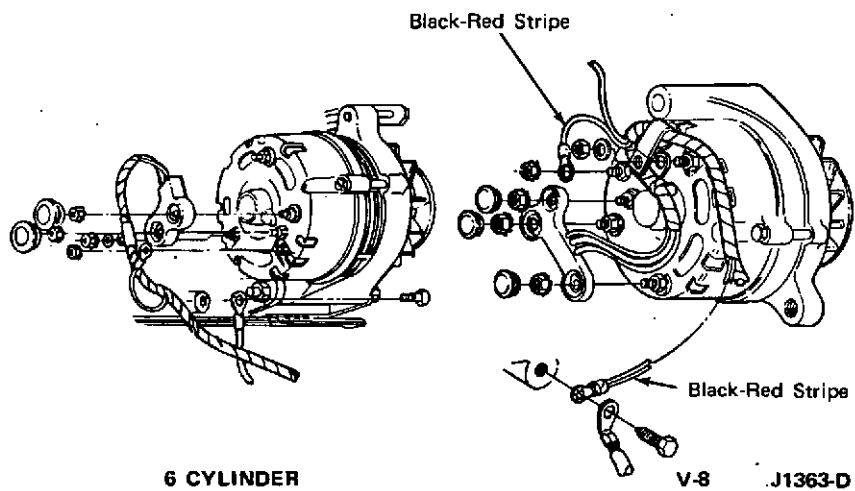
Wiring Harness Connections – Typical Except 65-Ampere Alternator
